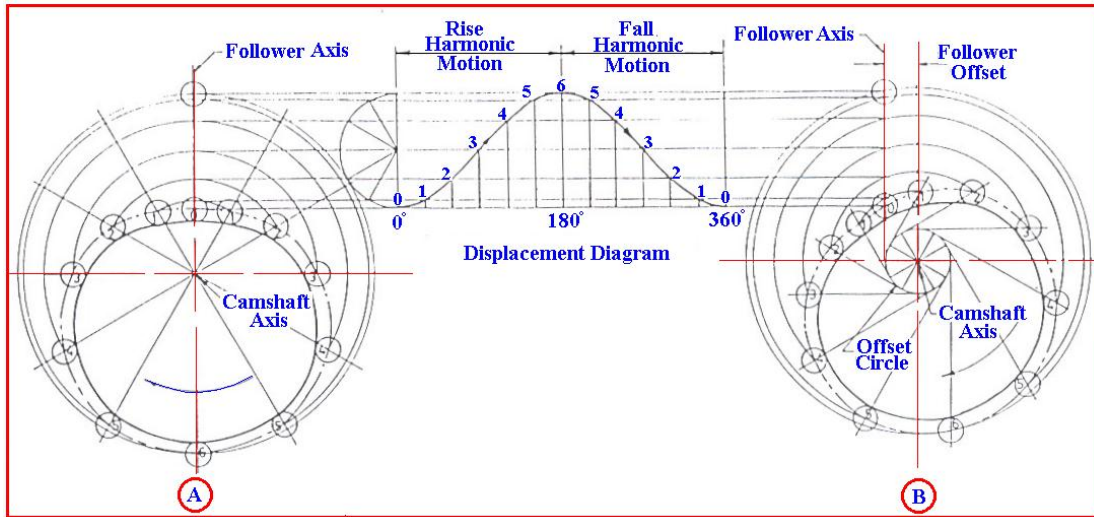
Layout of cam with (a) inline roller follower (b) offset roller follower
